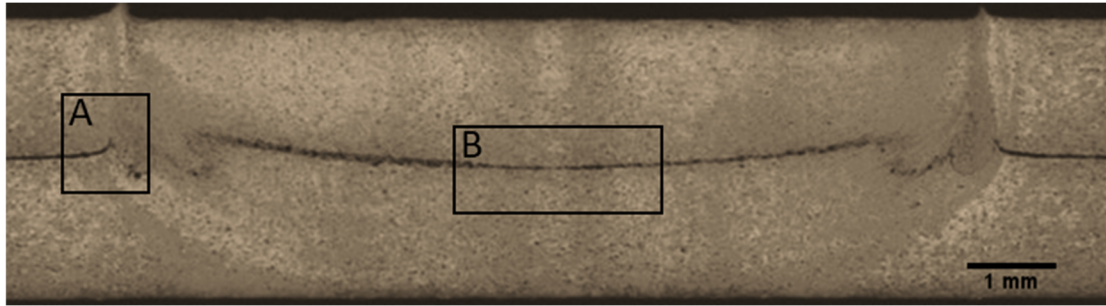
Hook (A) and oxide line remnant (B) of a cross section of a spot weld performed by Refill FSSW process.
